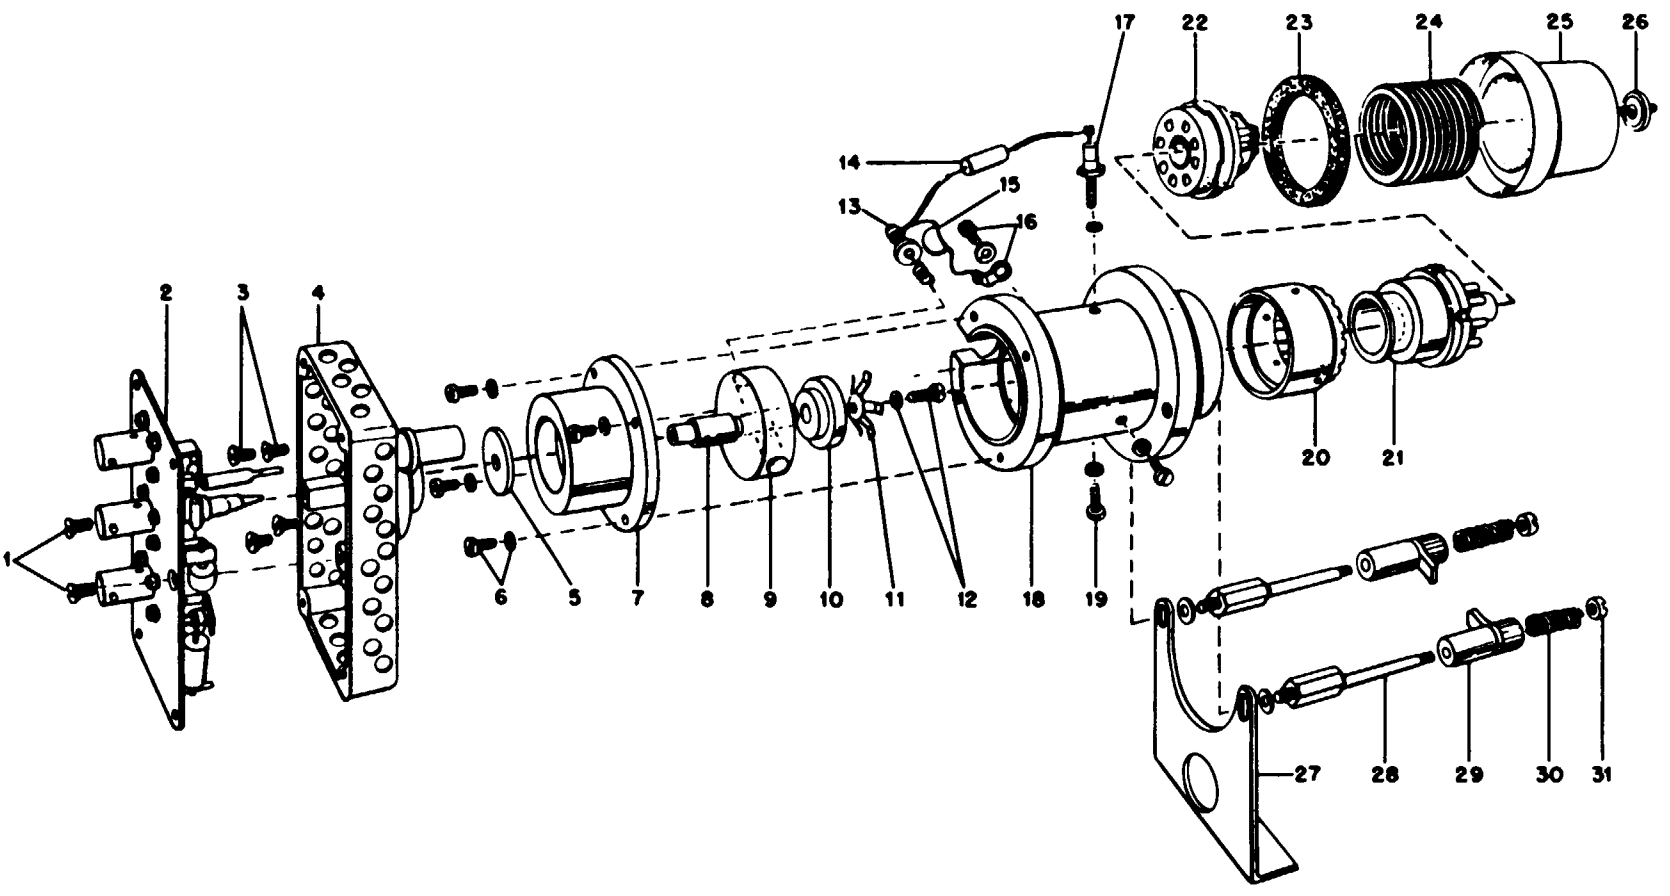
Demodulator Assembly 8A4, Exploded View
